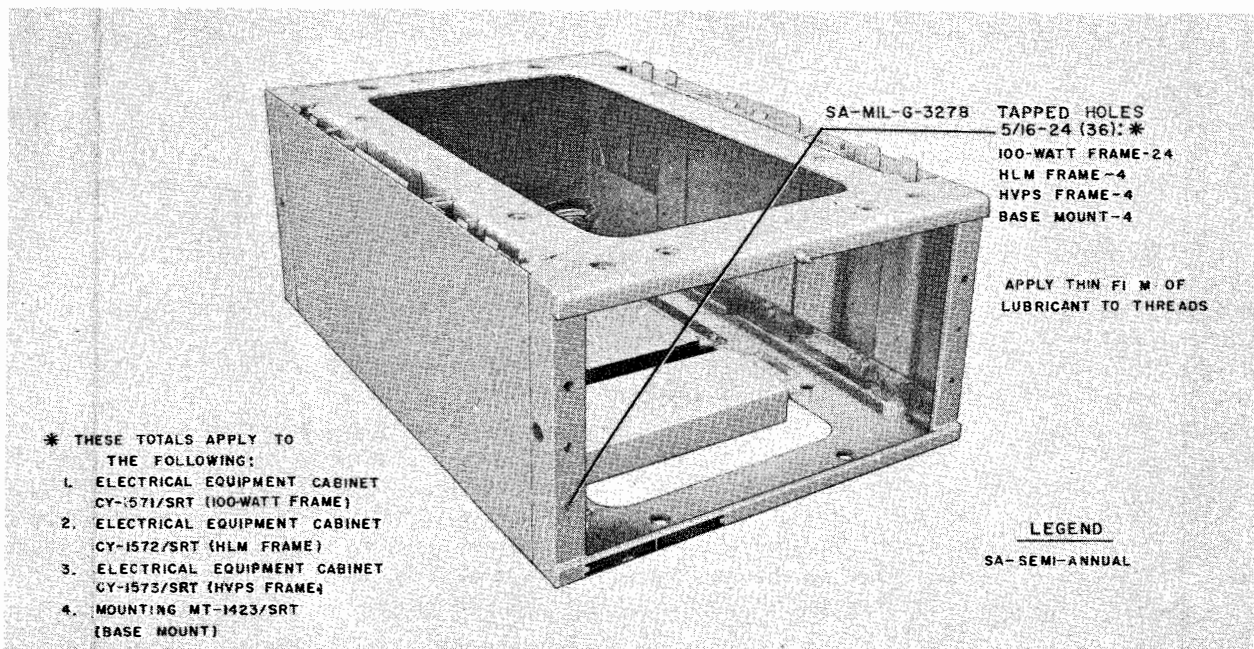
Electrical Equipment Cabinet and Base Mount Tapped Holes, Lubrication
